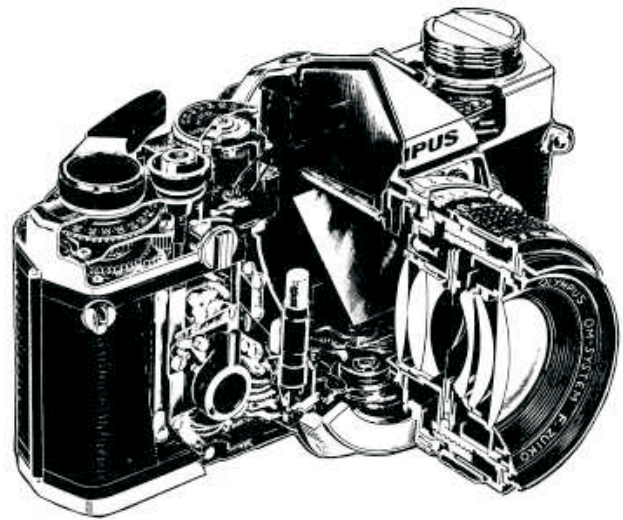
A cutaway view of a 35mm SLR camera.
